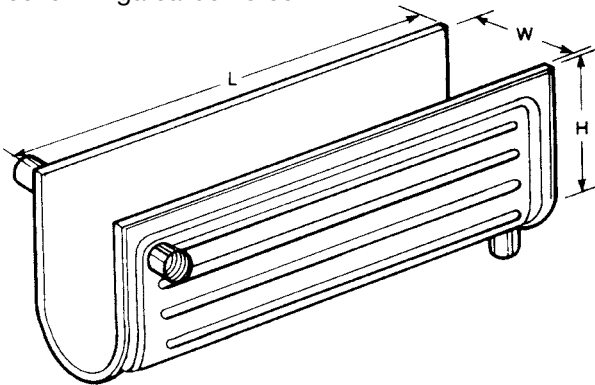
PLATECOIL Screw Conveyor Trough
